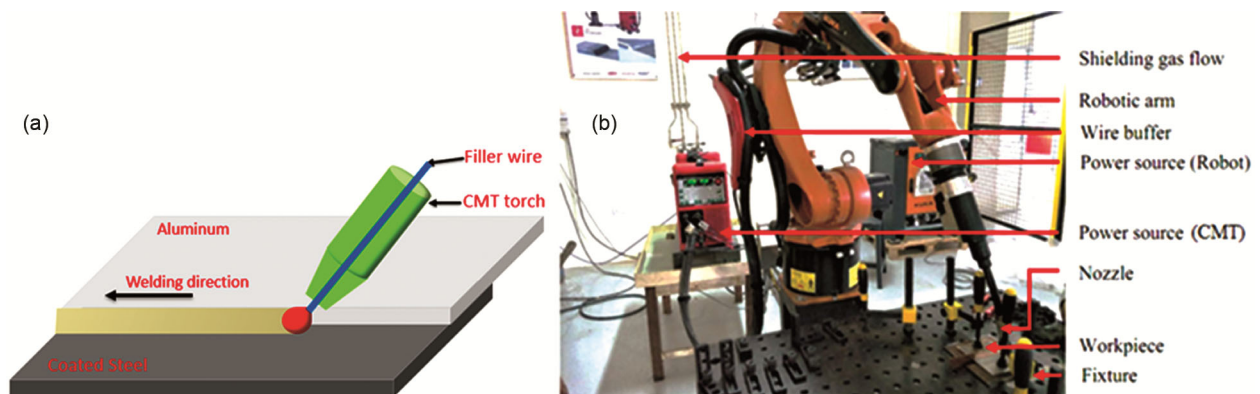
(a) Welding joint configuration, and (b) CMT machine setup with KUKA robot.
